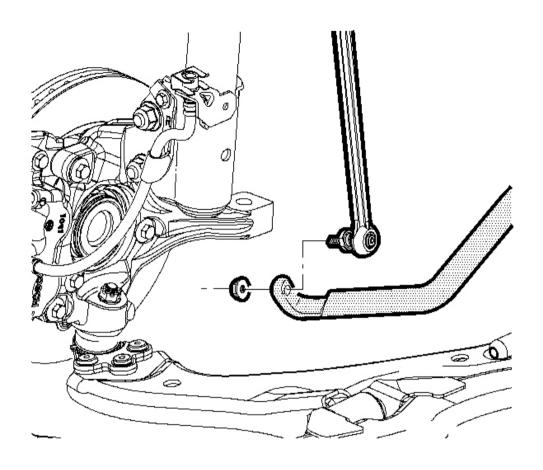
Locating Rod & Bar Courtesy of GENERAL MOTORS CORP.
